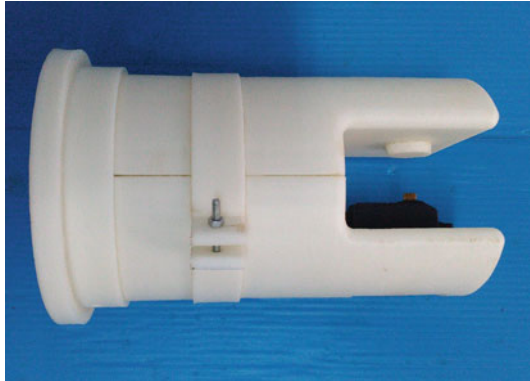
Photograph of a base link module assembled with a female link module to form a base link
